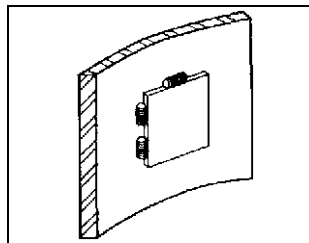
Reinforcing pad, staggered welds — adequate strength
